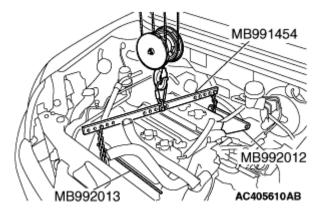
Hooking Engine Courtesy of MITSUBISHI MOTOR SALES OF AMERICA.
